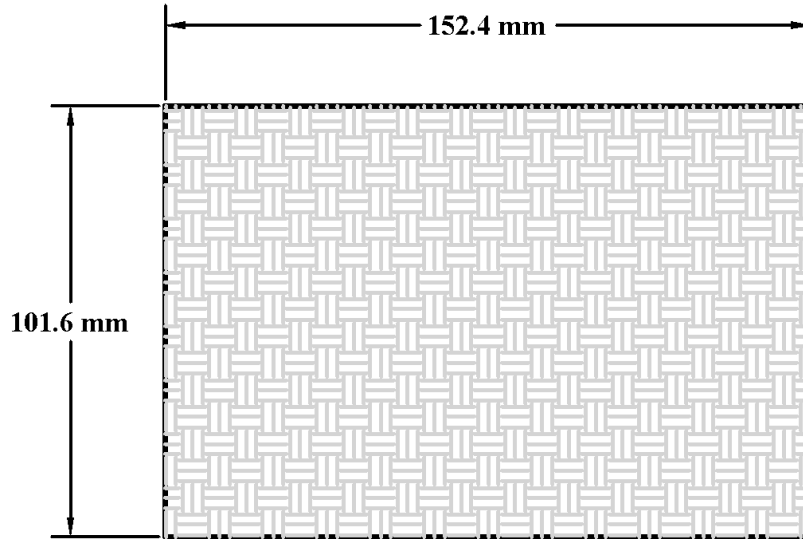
(c) Ballistic impact test specimen dimensions.
